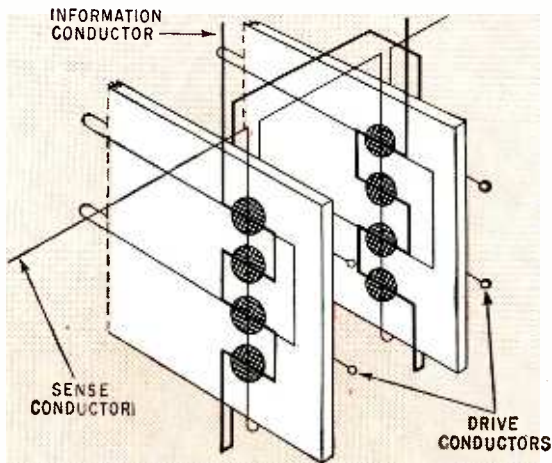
Exploded view shows method of assembling 4 by 7 sample memory
